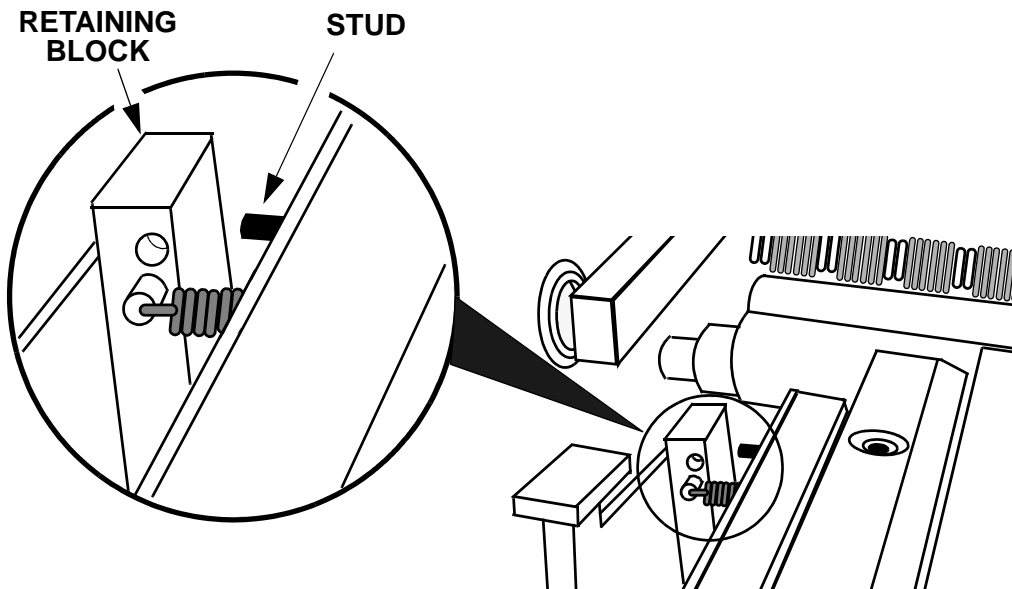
Pin Bar Mount Assembly (with Release Lever Open)
